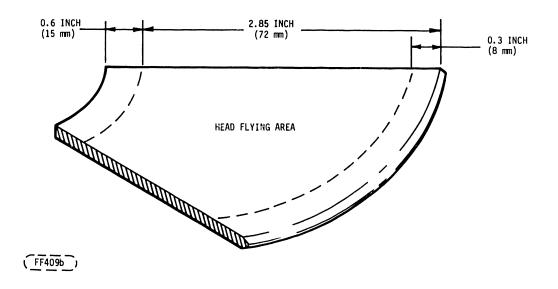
SECTION OF DISK SHOWING HEAD FLYING AREA
